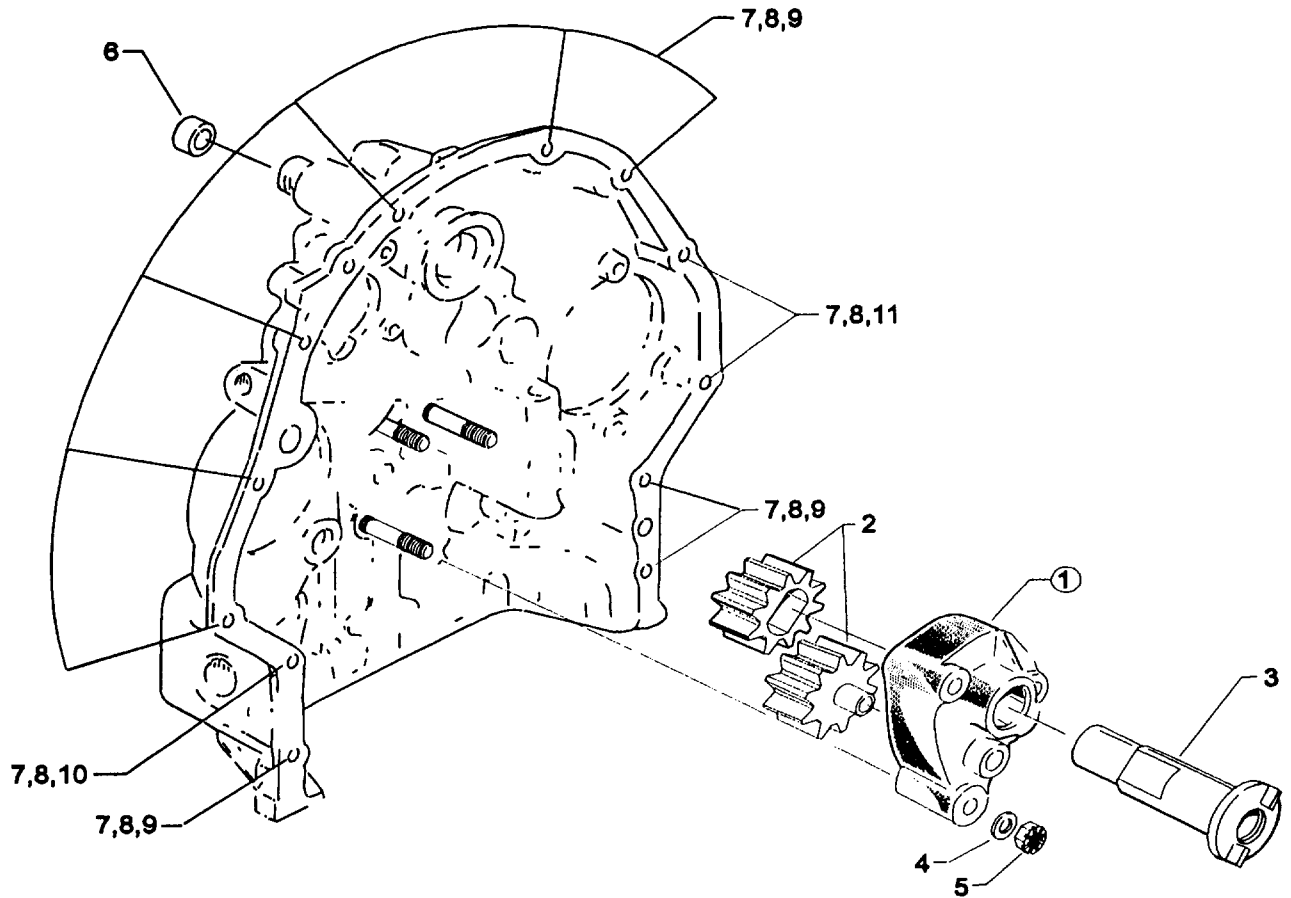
OIL PUMP AND ACCESSORY HOUSING ATTACHING PARTS
